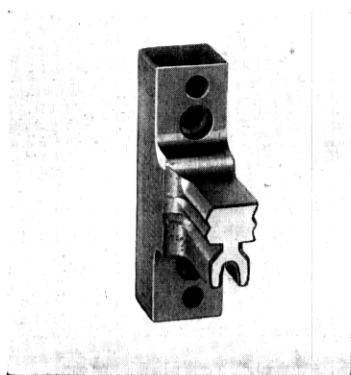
Rough milled blanking punch, solderless cord tip punch and die
